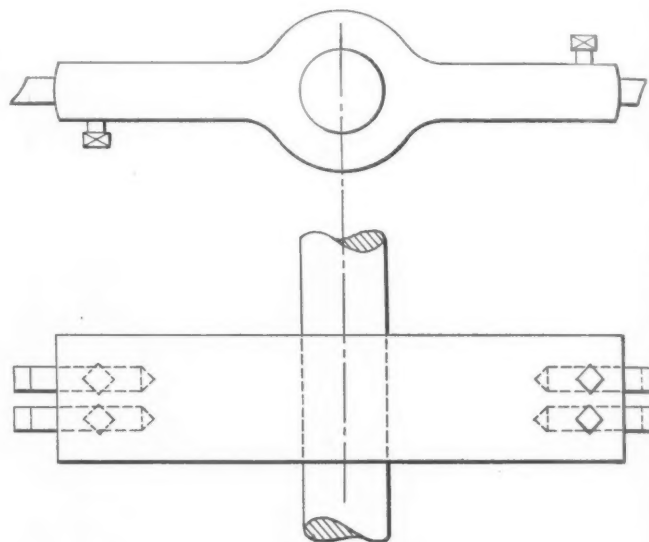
Non-Adjustable Boring Bar Head for Truing Up Piston Valve Bushings
